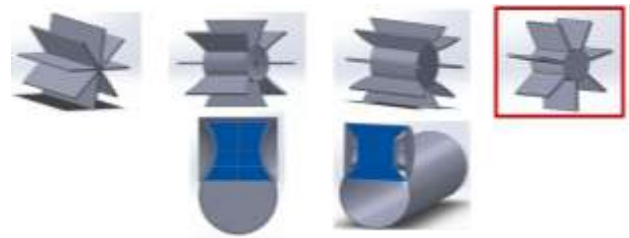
Hydrokinetic turbine and Pipe CAD design
